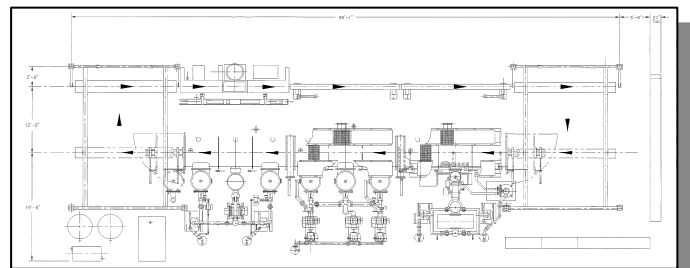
Semi-continuous Vacuum Aluminum Brazing Furnace Layout
